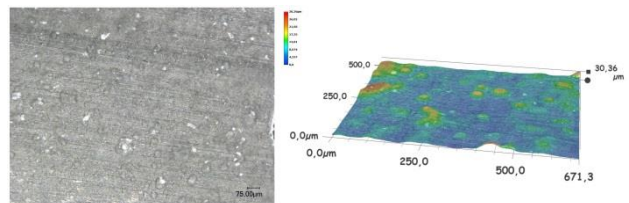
500x enlarged microscopic view on the surface of a CFRP part manufactured in a mould made from board material
